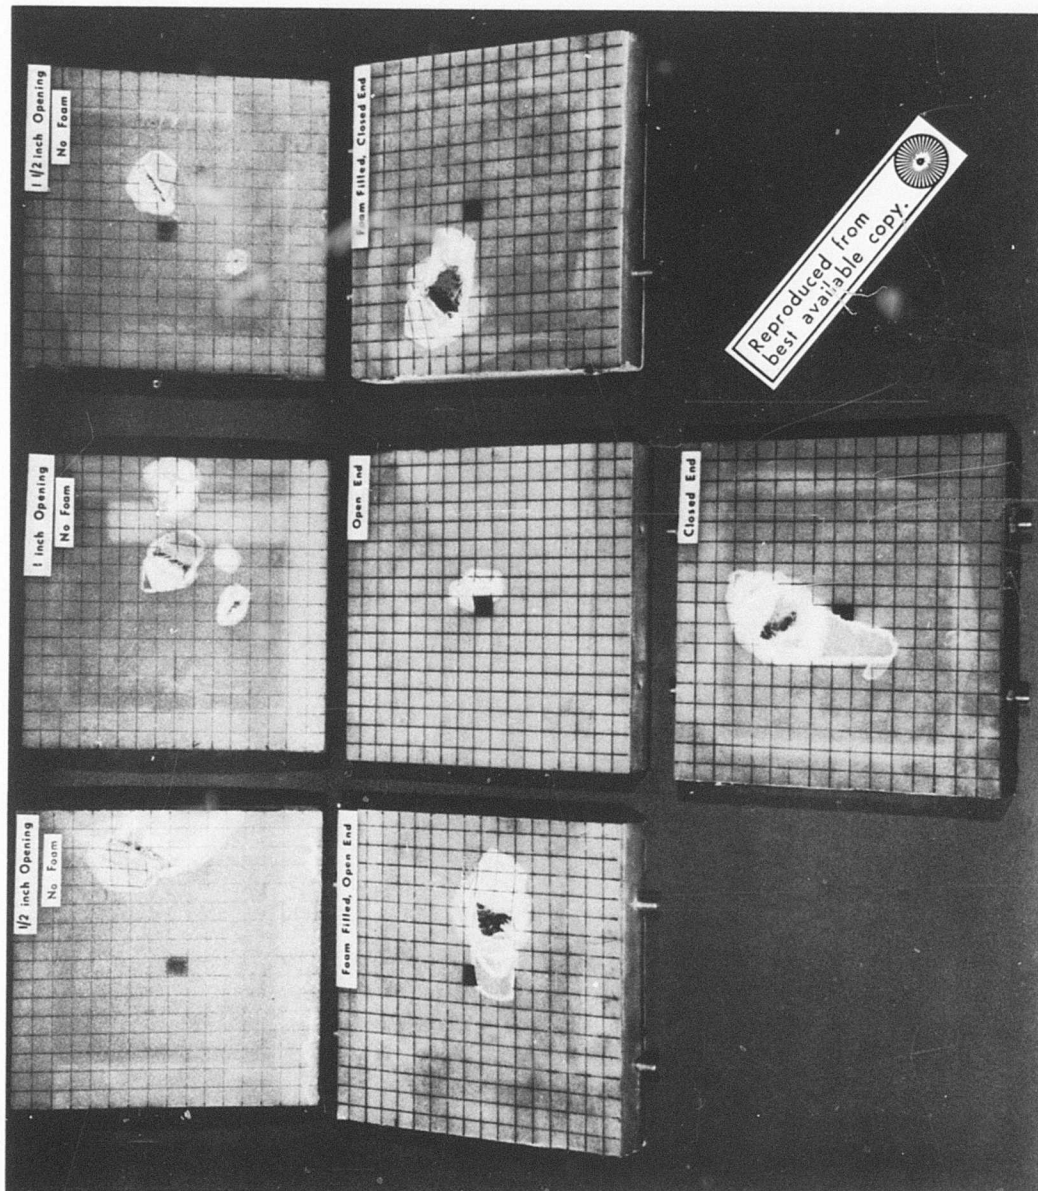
Typical Exit Damage on Various Types of Sandwich Construction.
